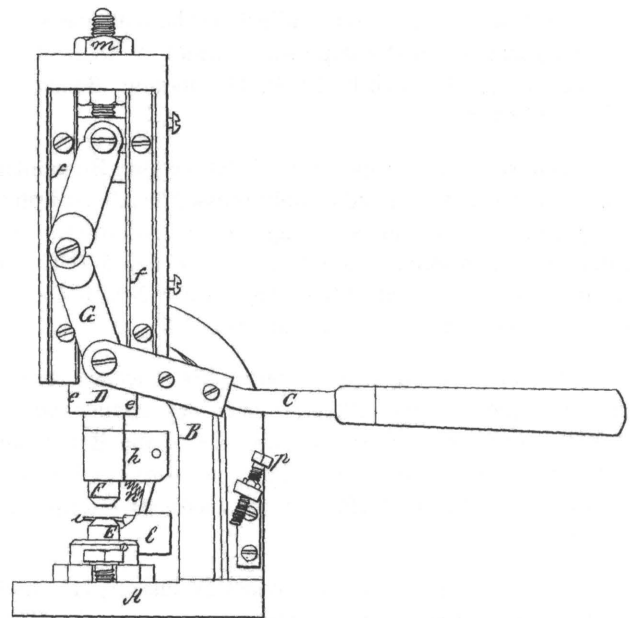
Improved glass-pressing machine patented by George J. Capewell (U.S. Patent No. 79,635) on July 7, 1868.
